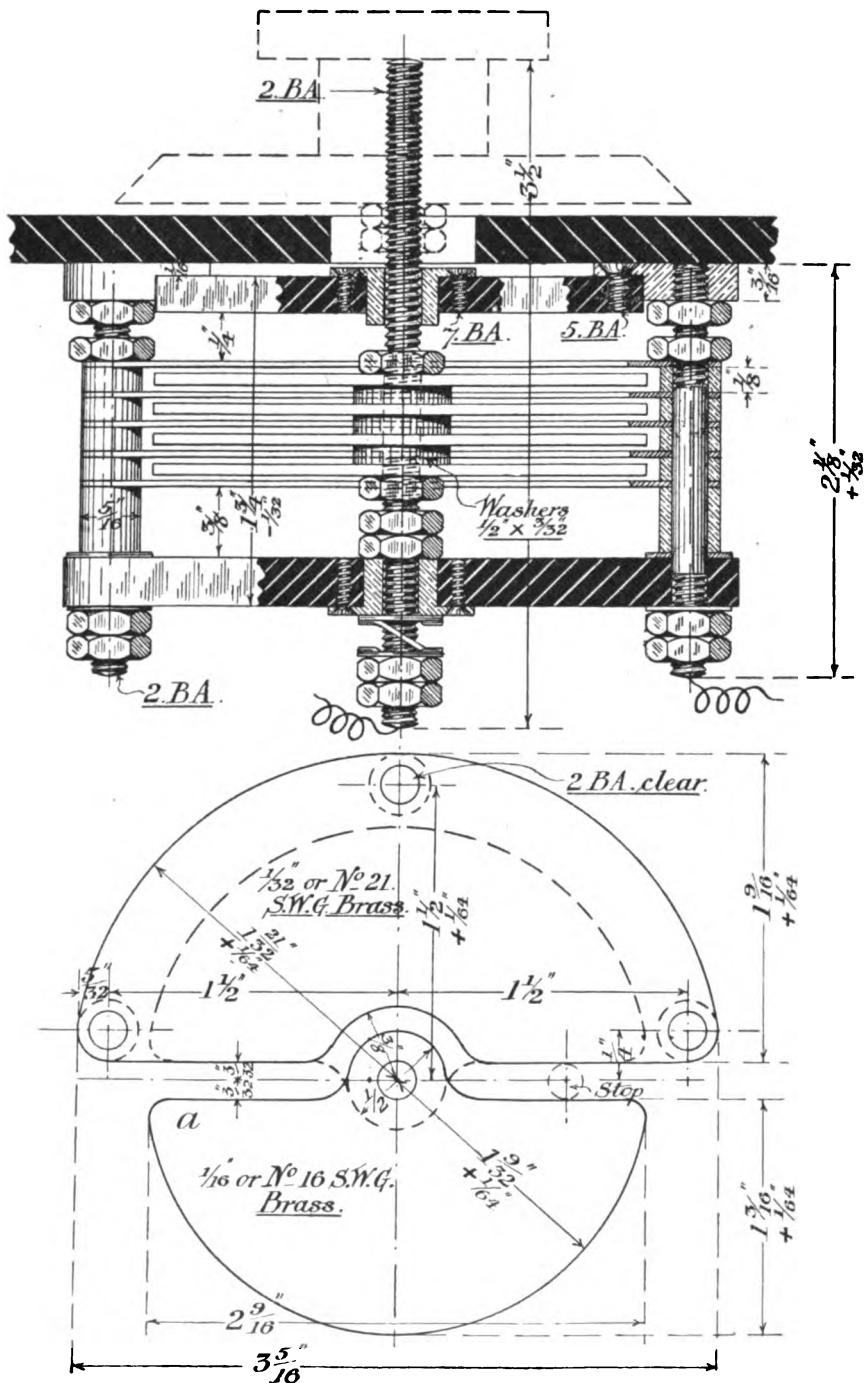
Sectional Elevation of Condenser and Plan of Plates.
